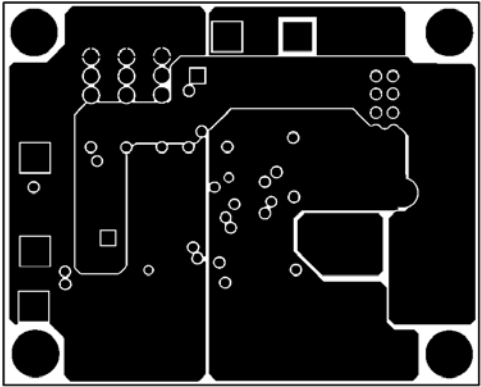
Middle Layer1 of Evaluation Board PCB Layout
